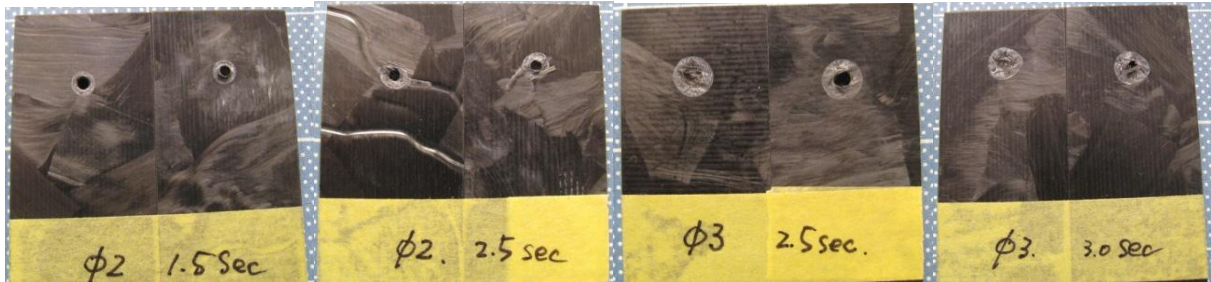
Joint part of single lap specimens by spot welding (CTT).
